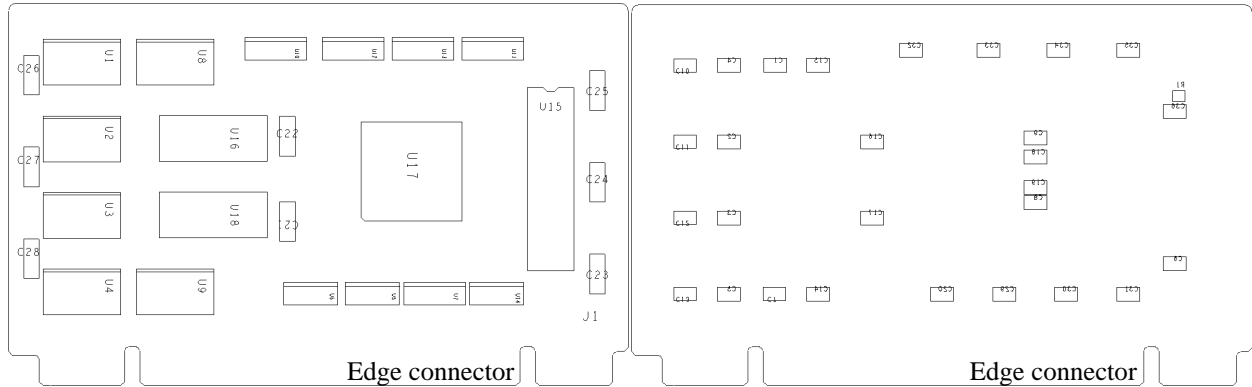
Top (left) and bottom (right) view of the printed circuit board used for numerical testing
